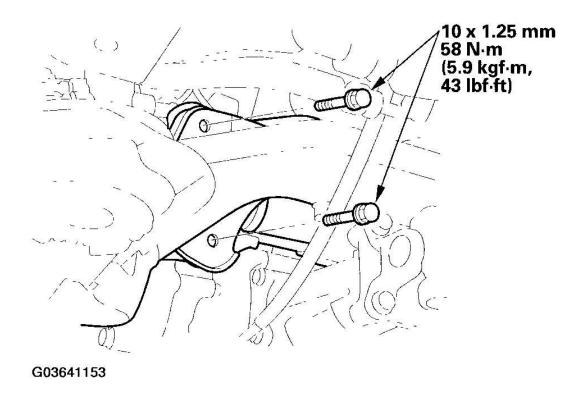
Installing Two 10 mm Flange Bolts On Left Side Of Gearbox Courtesy of AMERICAN HONDA MOTOR CO., INC.
